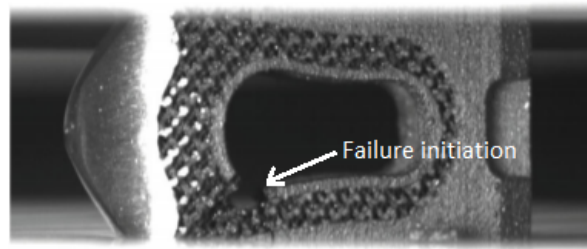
Fatigue failure of a spinal cage [11].
